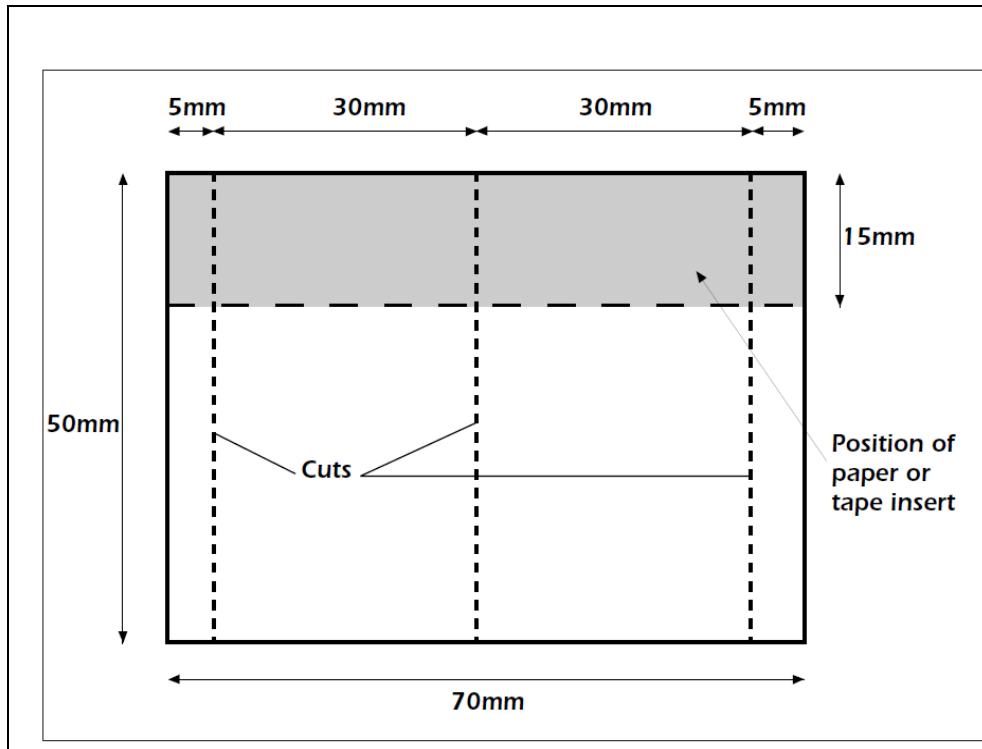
TEST SPECIMENS ARE TO BE CUT FROM BONDED ASSEMBLY
